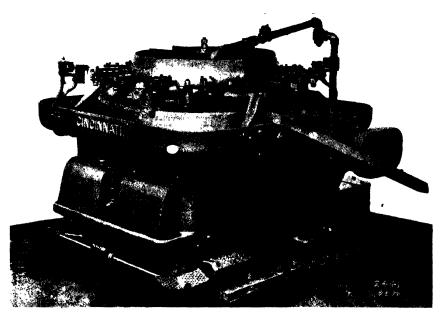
SPECIAL-PURPOSE ROTARY BROACHING MACHINE
